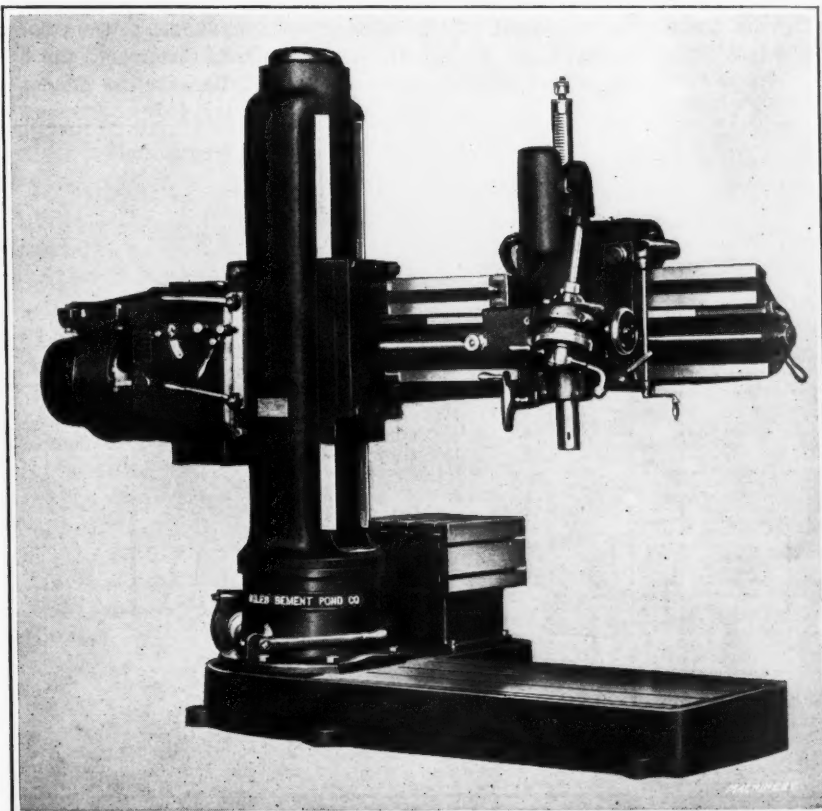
Plain Type of Radial Drilling Machine built by the Niles-Bement-Pond Co.
